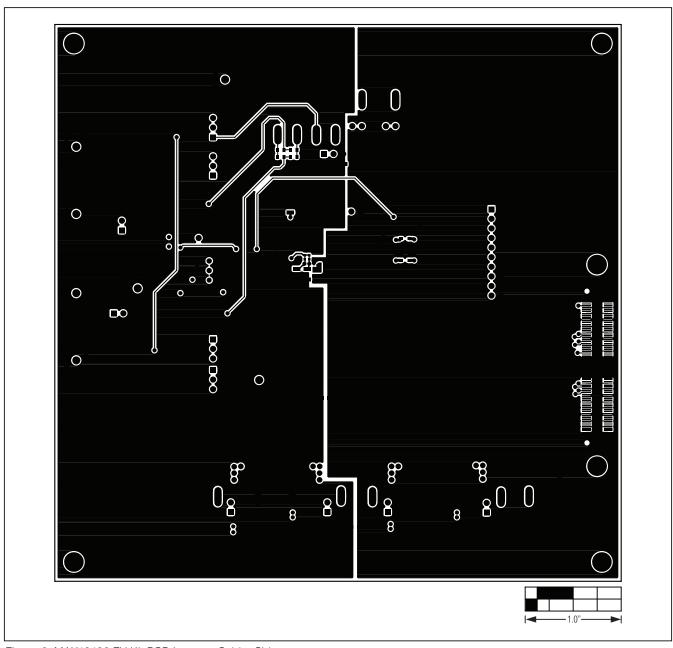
MAX19192 EV Kit PCB Layout—Solder Side
